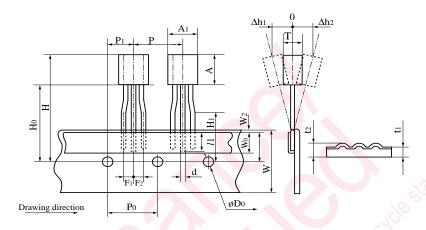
TO-92 Type Package Taping-Dimensions (Ammunition pack)
